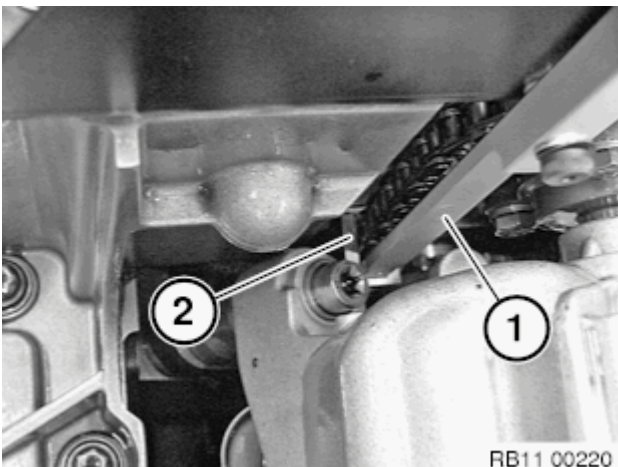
Positioning Drag Pointer Of Special Tool (2 213 485)
